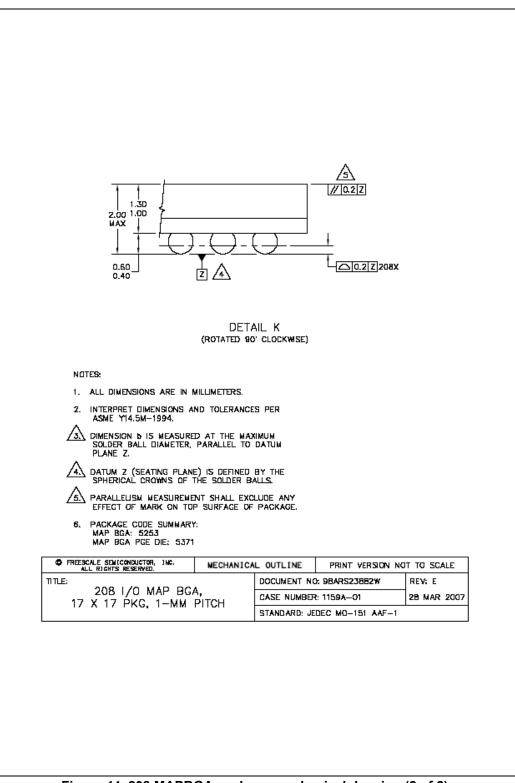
208 MAPBGA package mechanical drawing (2 of 2)
